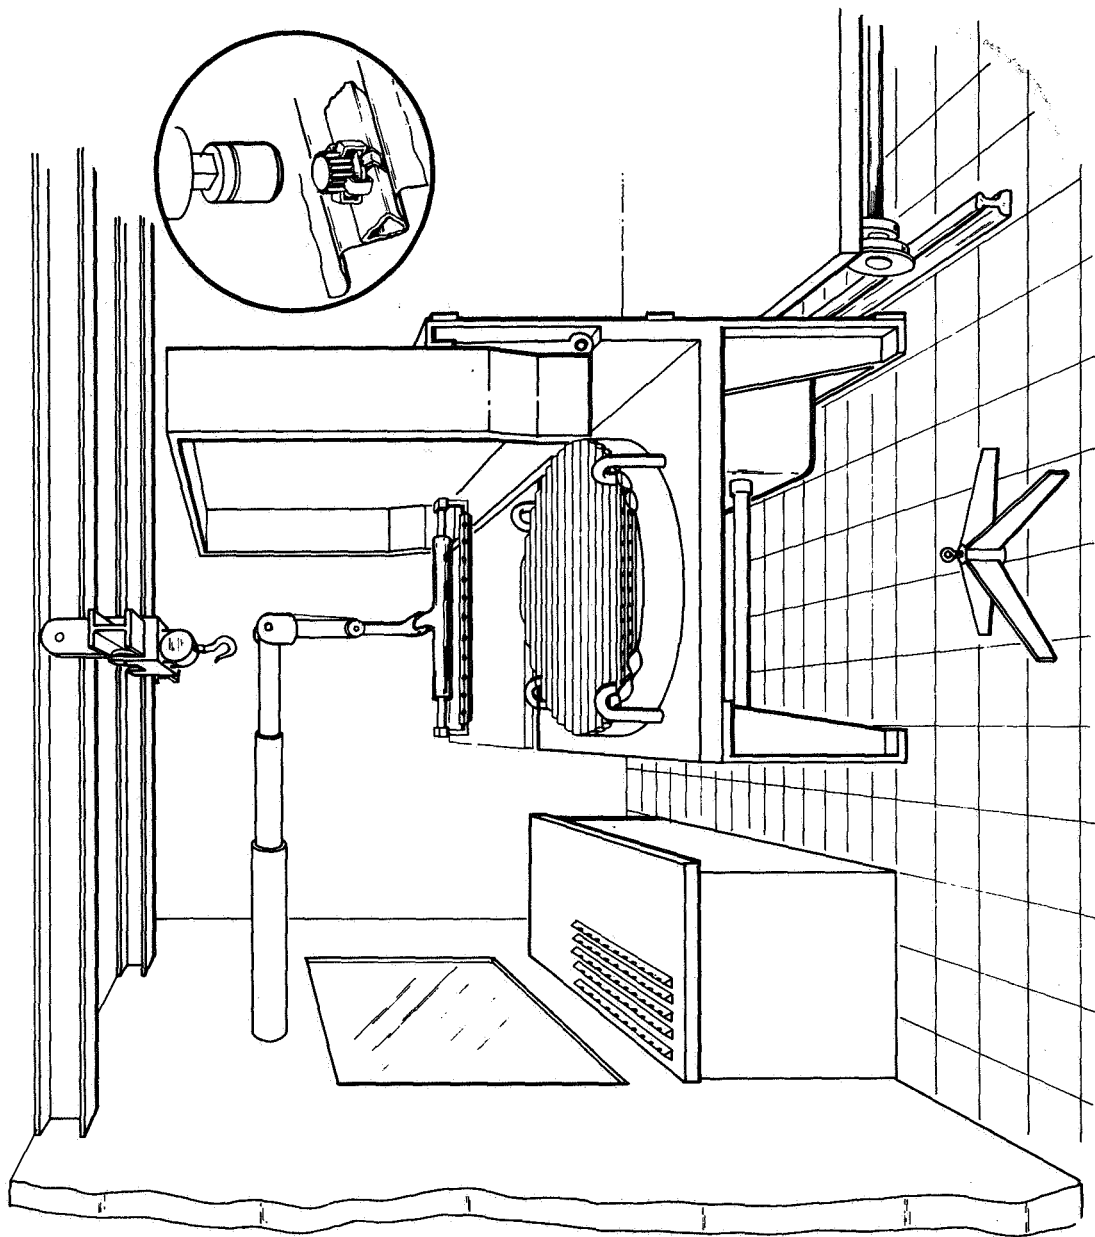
RETENTION SYSTEM ASSEMBLY
